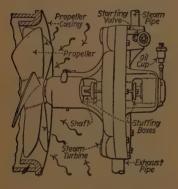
Propeller-fan blower driven, by steam turbine, through direct-shaft-connection (Power Turbo-Blower Co.).
